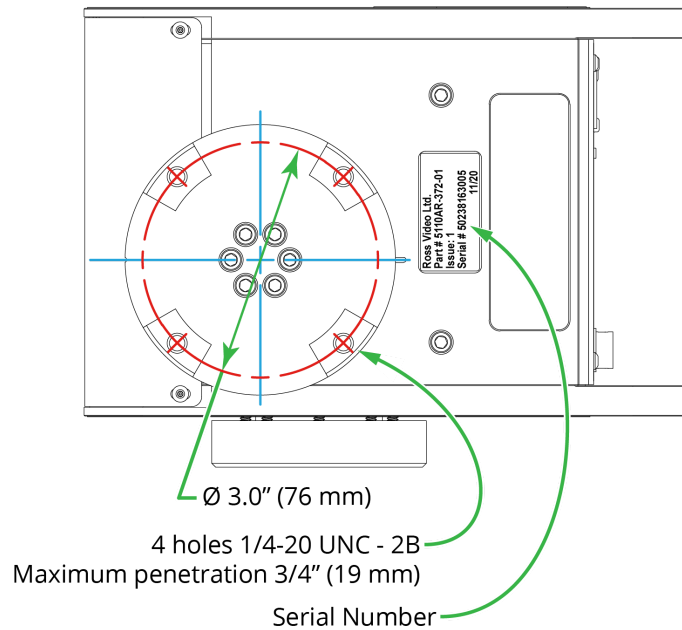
Bottom of an X300 Head, showing Mount Hole Spacing
